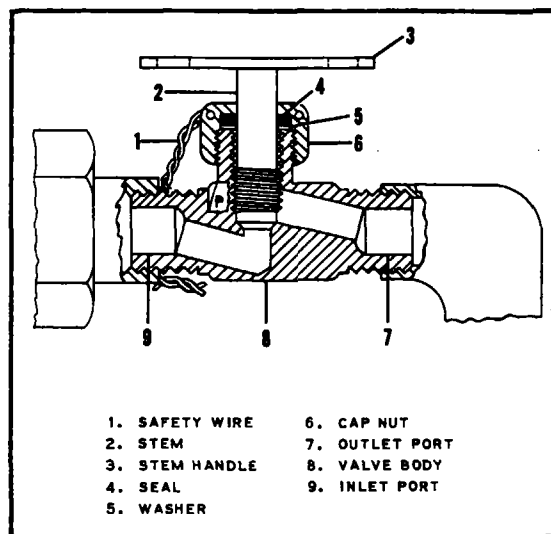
Heater Fuel Valve, Serial Nos. 27-1 to 27-7405431 incl.
